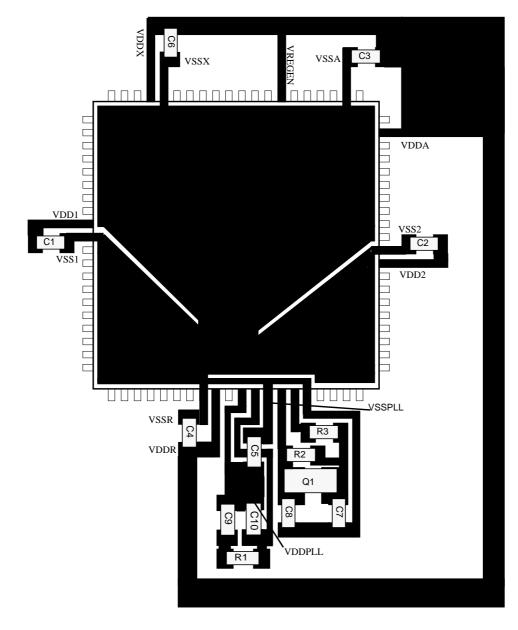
Recommended PCB Layout for 80QFP Pierce Oscillator
